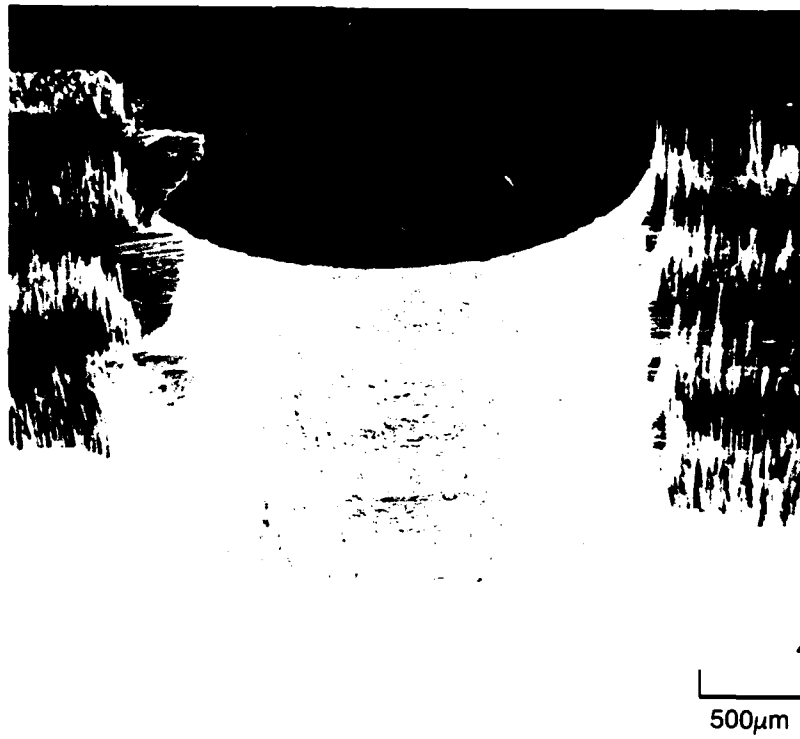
(b). Tensile Fracture Surface of 0/90° Reinforced 7740/HMU Composite with 3.1 mm Hole
